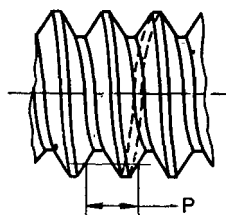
SINGLE-START THREAD WITH RIGHT-HAND EXTERNAL THREAD
